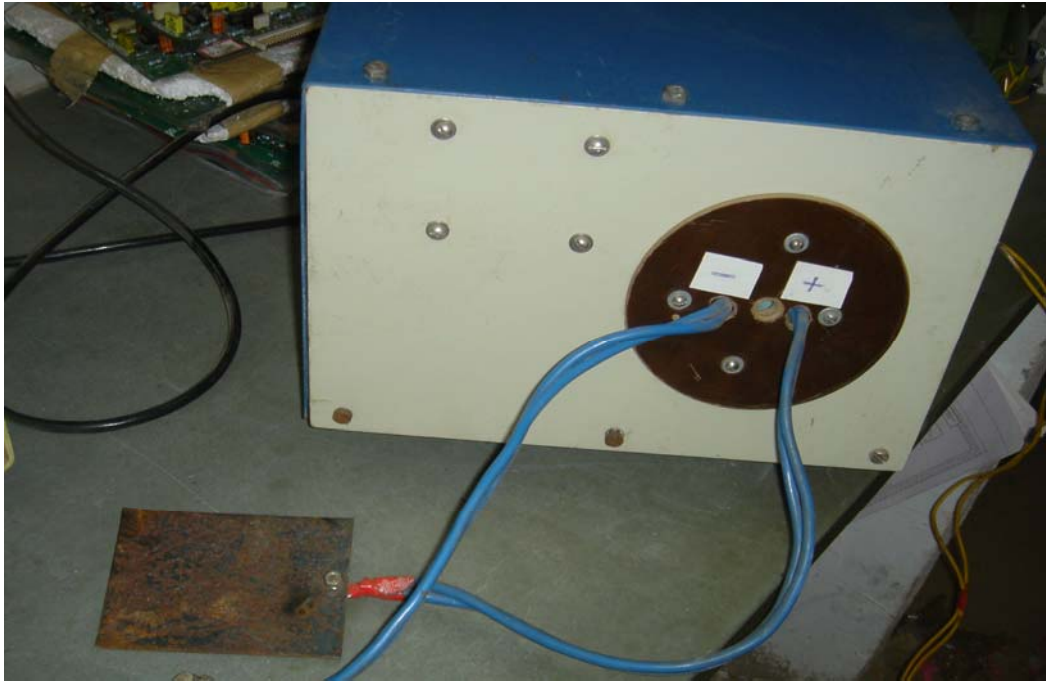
Output side of the SCR based inverter welding machine
